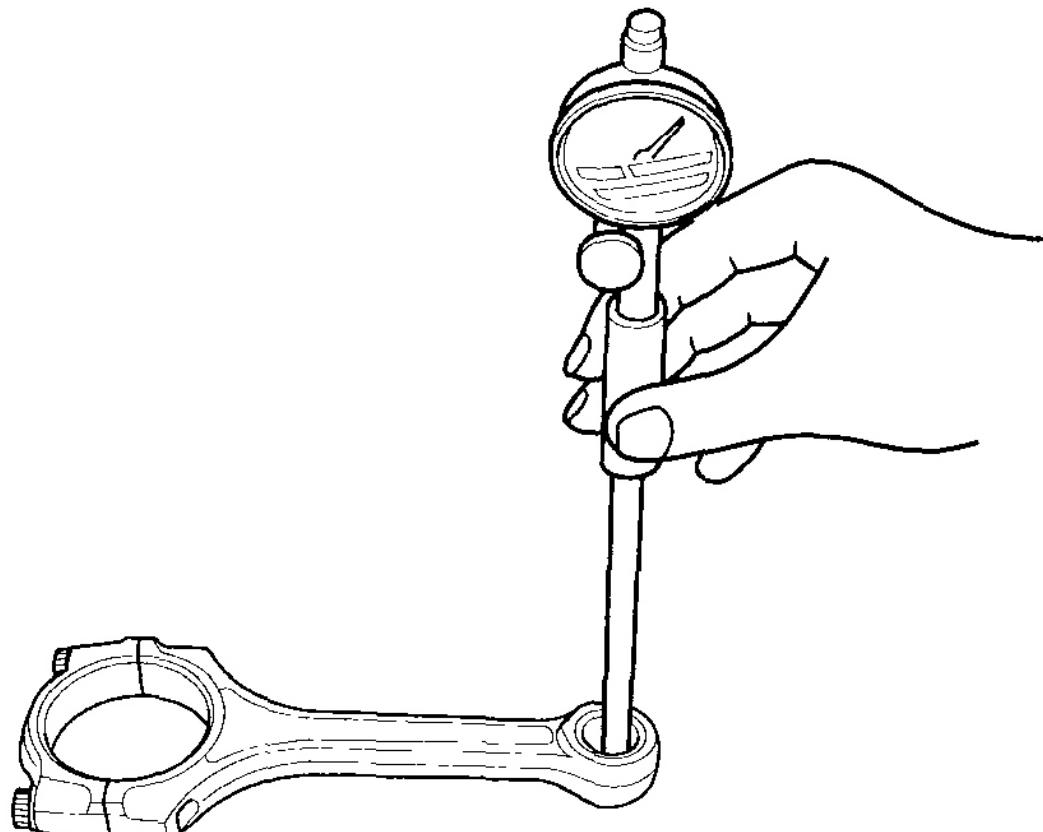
Checking Difference Between Piston Pin Diameter & Piston Pin Hole Diameter
